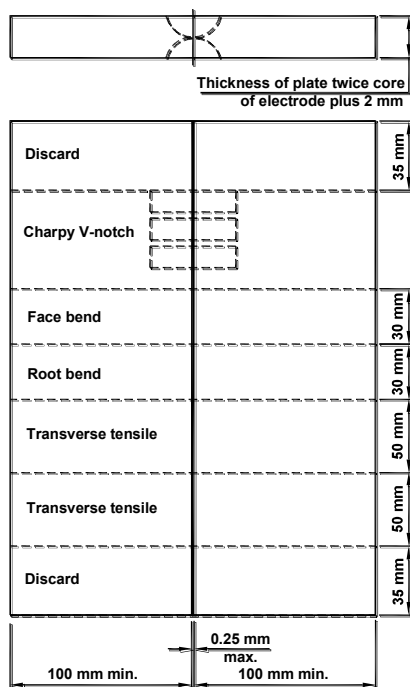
Deep penetration butt weld test assembly
